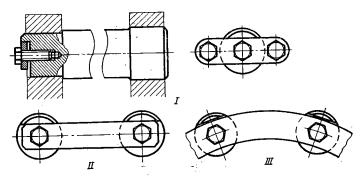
Stepped pivot pins fixed against axial and angular displacements by end plates
